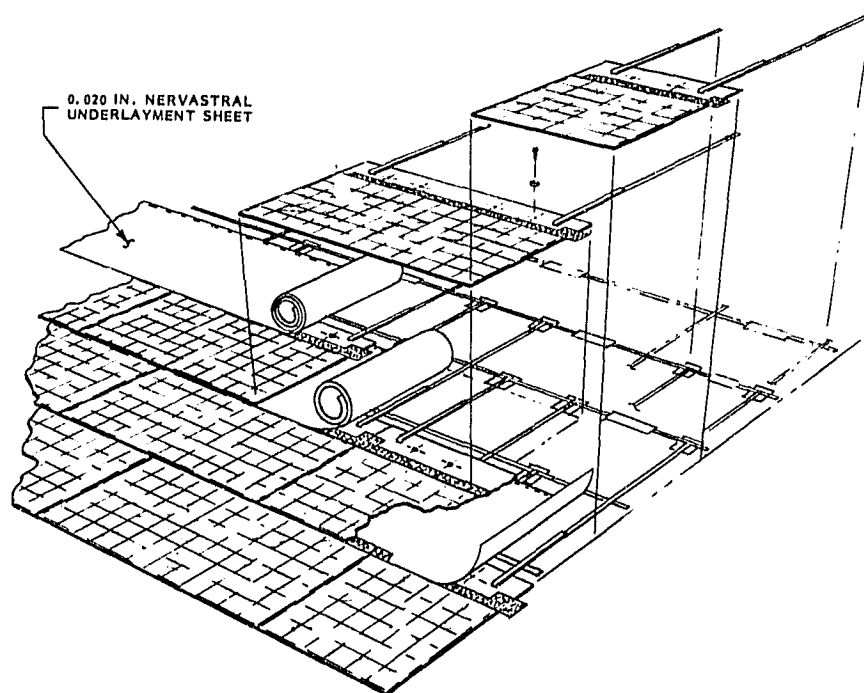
Installation Details for Concept No. 1 (Pictorial View of Overlapped Arrangement)
